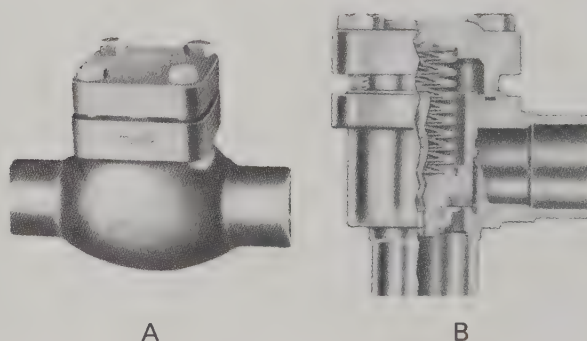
Check valves. A—The arrow on the body of this globe-type check valve shows proper direction for flow. B—This cutaway angle-type check valve shows the spring that holds the seat closed. Flow into the valve from the bottom will be allowed to pass, but backward flow (from the right) will be blocked. (Henry Valve Co.)
